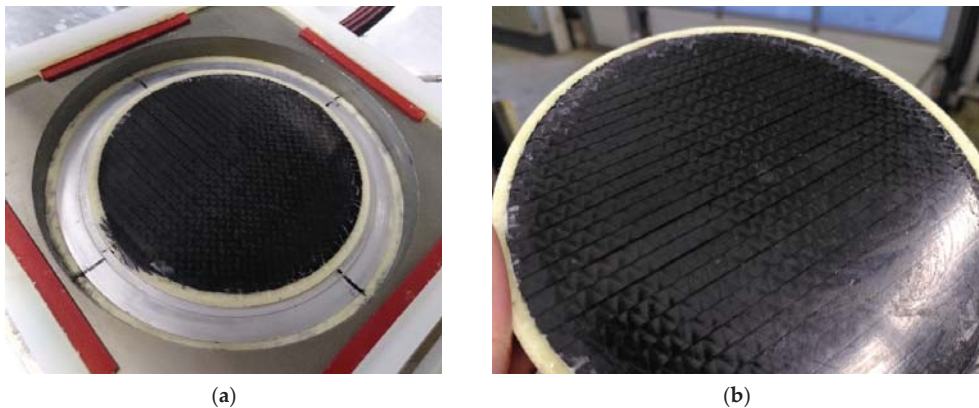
D-SCM sandwich structures: in the lower cavity after mold opening (a); demolded, cured sandwich component (b).
